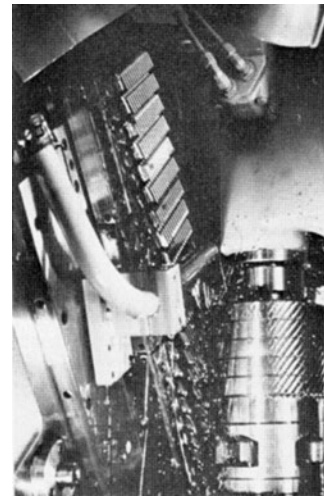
Generating helical gear teeth on a stack of gear blanks by the G-TRAC machine. (Courtesy of Gleason Works, Rochester, New York.)
